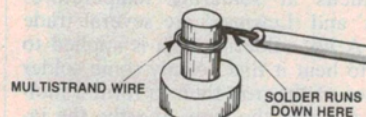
'Wicking' is caused by solder running back up the strands of multi-strand hookup wire. This makes the wire brittle at the joint and movement may break it.
